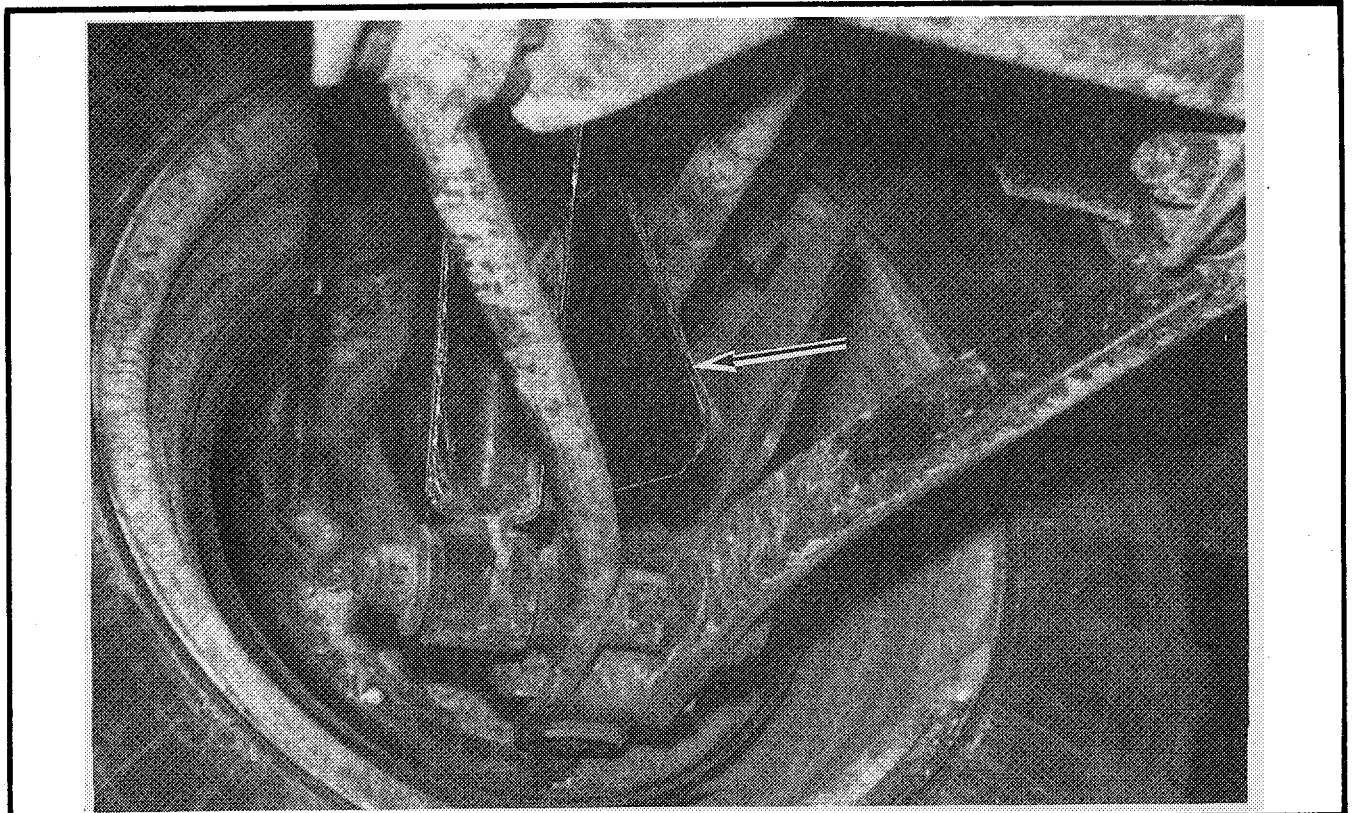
Left Rear Wheel Dust Boot Guard Installed
